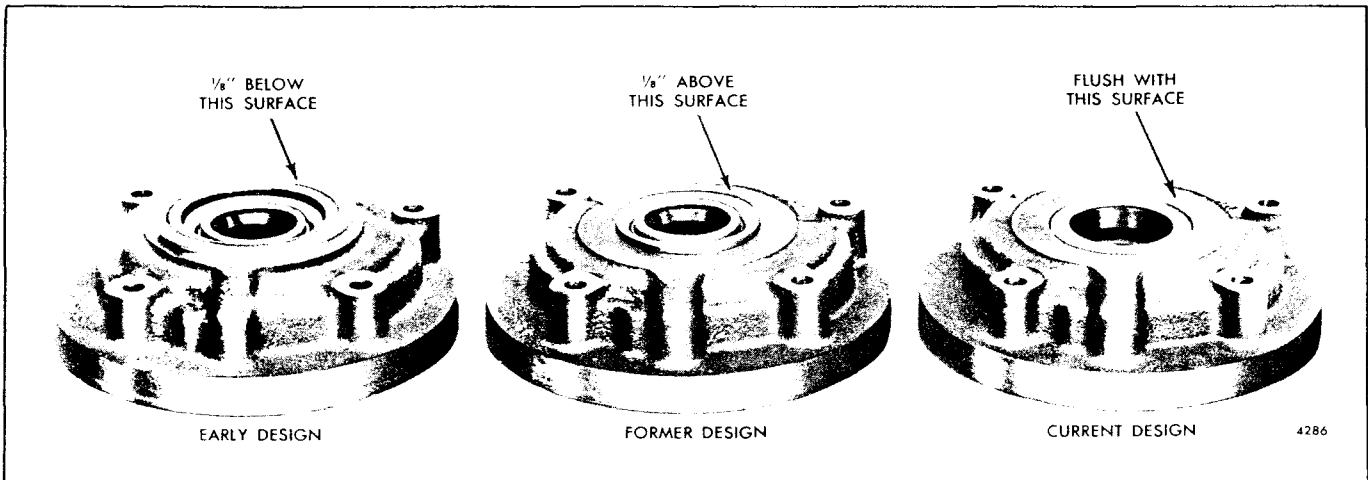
Position of Oil Seals Installed in Marine Gear Oil Pump Housings
